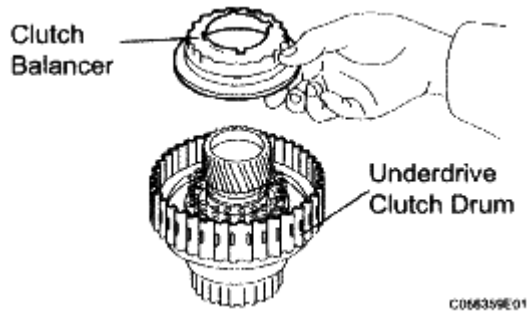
Removing Clutch Balancer From Underdrive Clutch Drum
